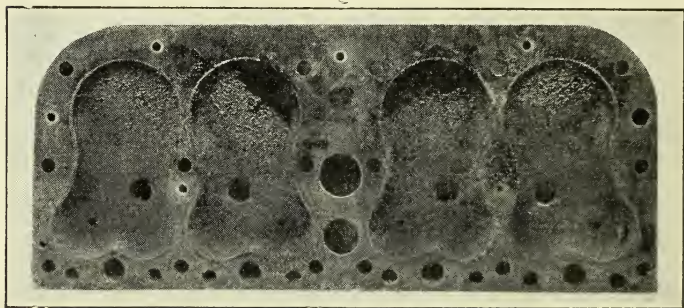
A TYPICAL CYLINDER-HEAD SHOWING THE CARBON DEPOSIT IN A TRACTOR ENGINE
